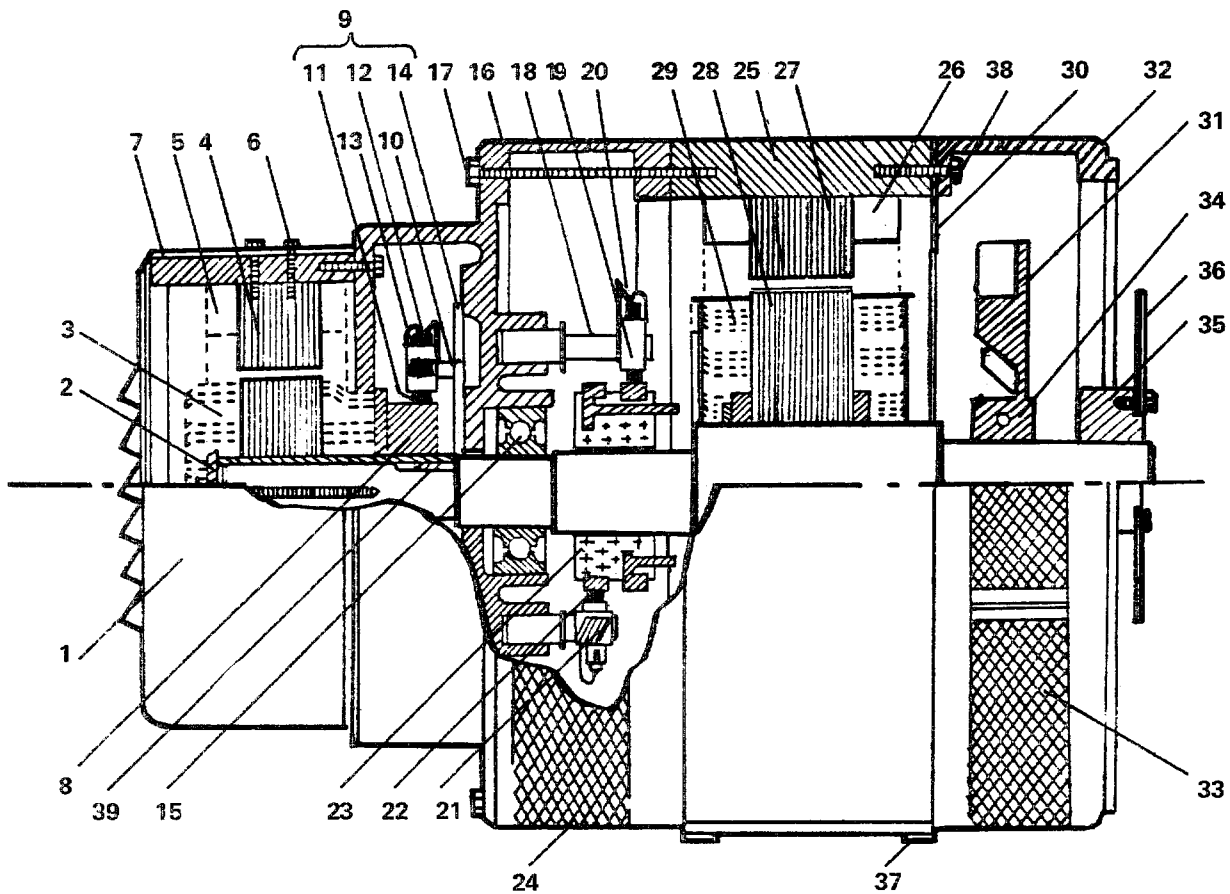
CROSS SECTIONAL VIEW - TYPICAL SINGLE BEARING REVOLVING FIELD AC GENERATOR WITH DIRECT CONNECTED BRUSH TYPE DC EXCITER.
